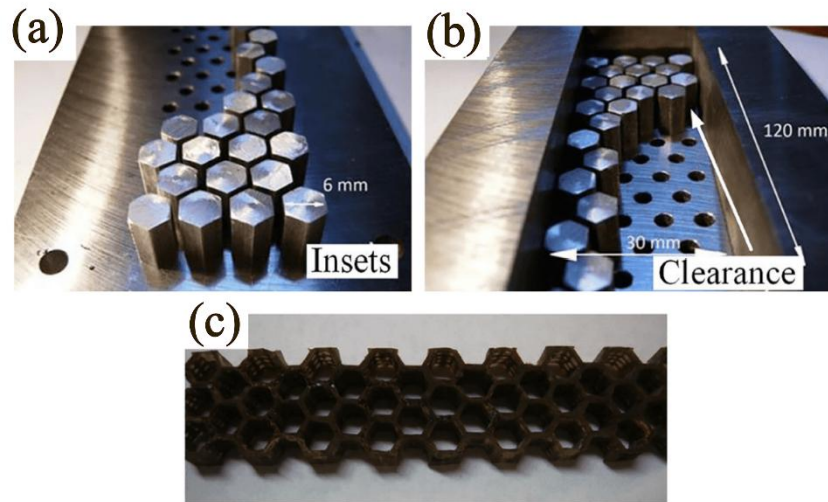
4. The hot press molding process [24]: (a) bottom plate with inserts, (b) pre-assembled honeycomb structure, (c) final fabricated honeycomb core.
